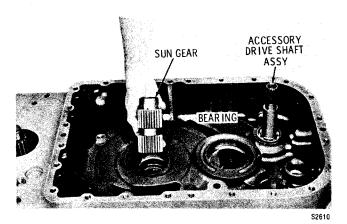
Installing forward-and-reverse sun gear (-1 models)
